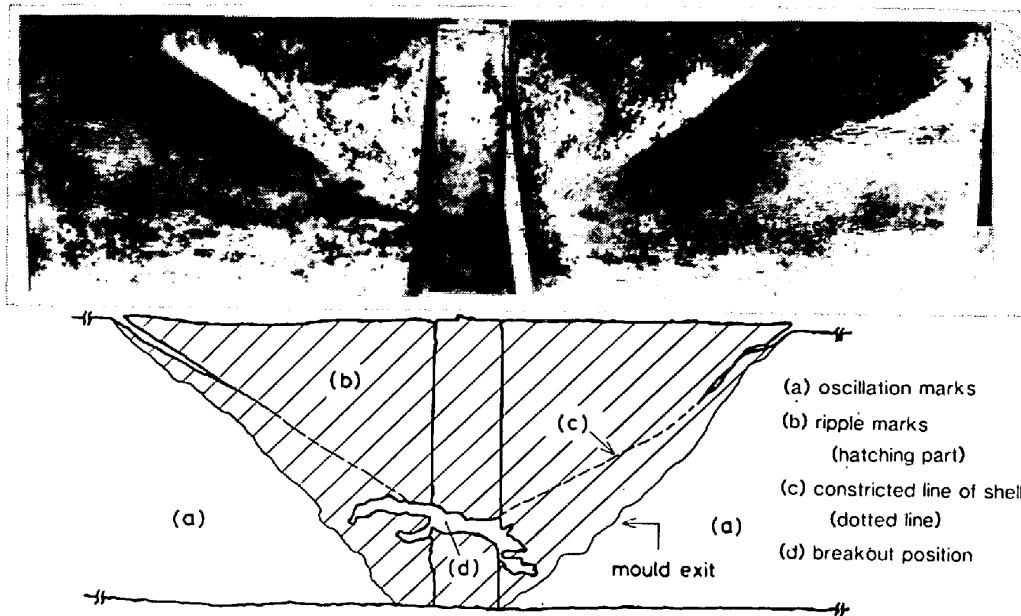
Developed surface of Type-II shell remained in mould after breakout.
